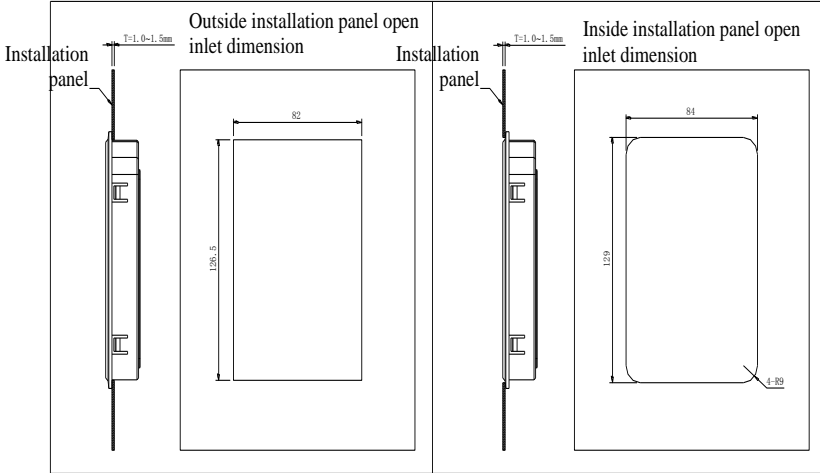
Keyboard installation opening dimension diagram (dimension unit: mm)
